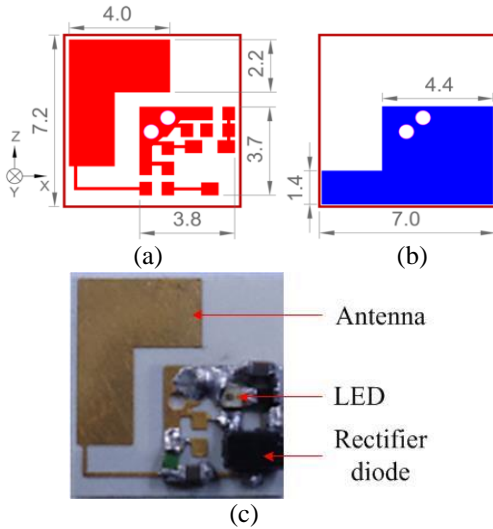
Geometry of the proposed rectenna (dimensions in millimeters): (a) front view, (b) back view, and (c) photograph.
